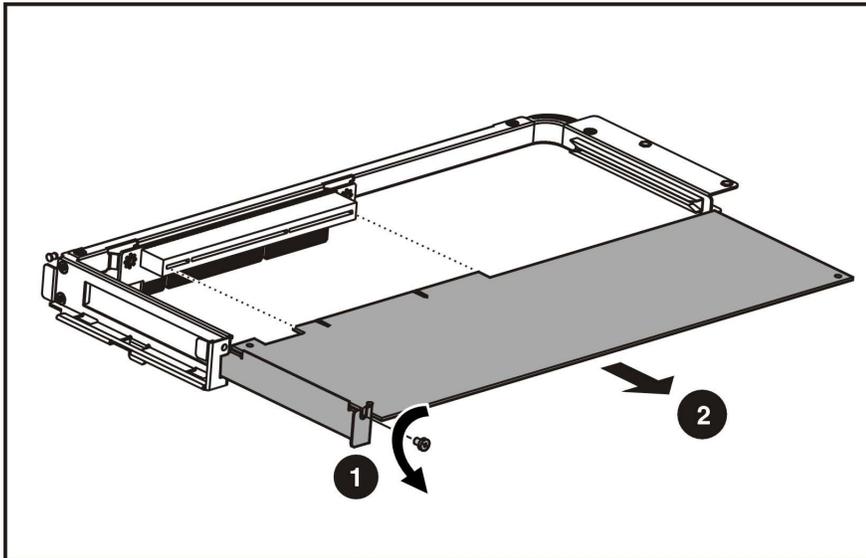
Removing an expansion board from the PCI riser board assembly
